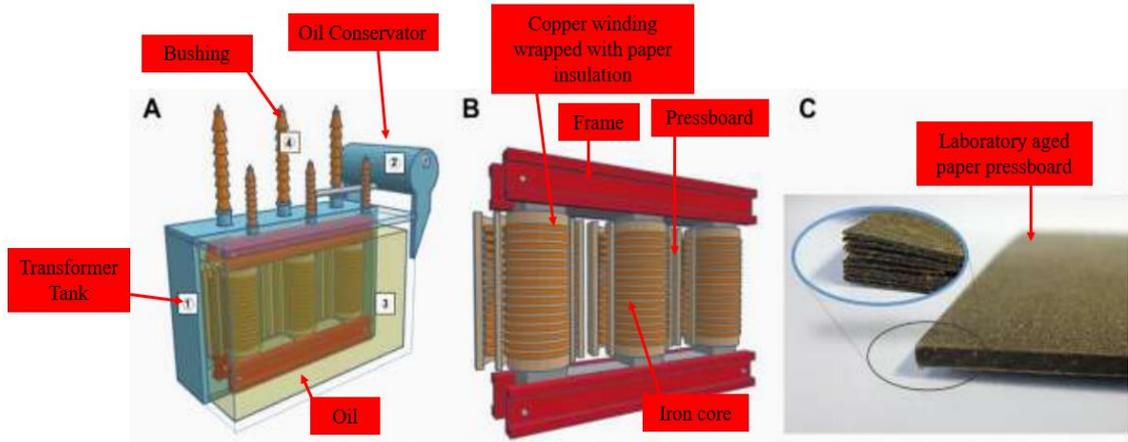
Show a) power transformer, b) power transformer core (section between core and winding and c) several kraft paper pressed by pressboard [4].
